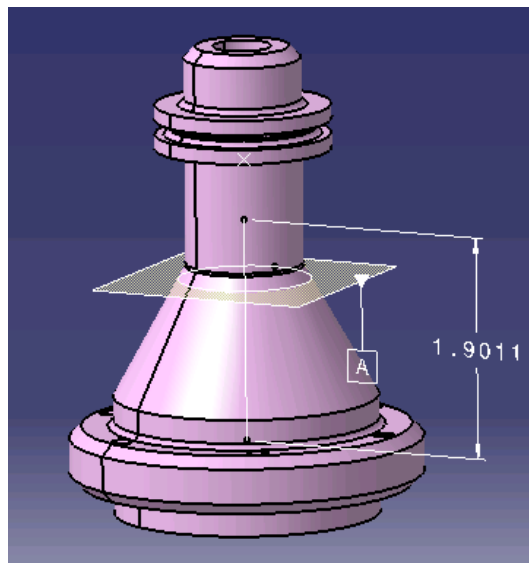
Datum “A” referencing a construction geometry element
